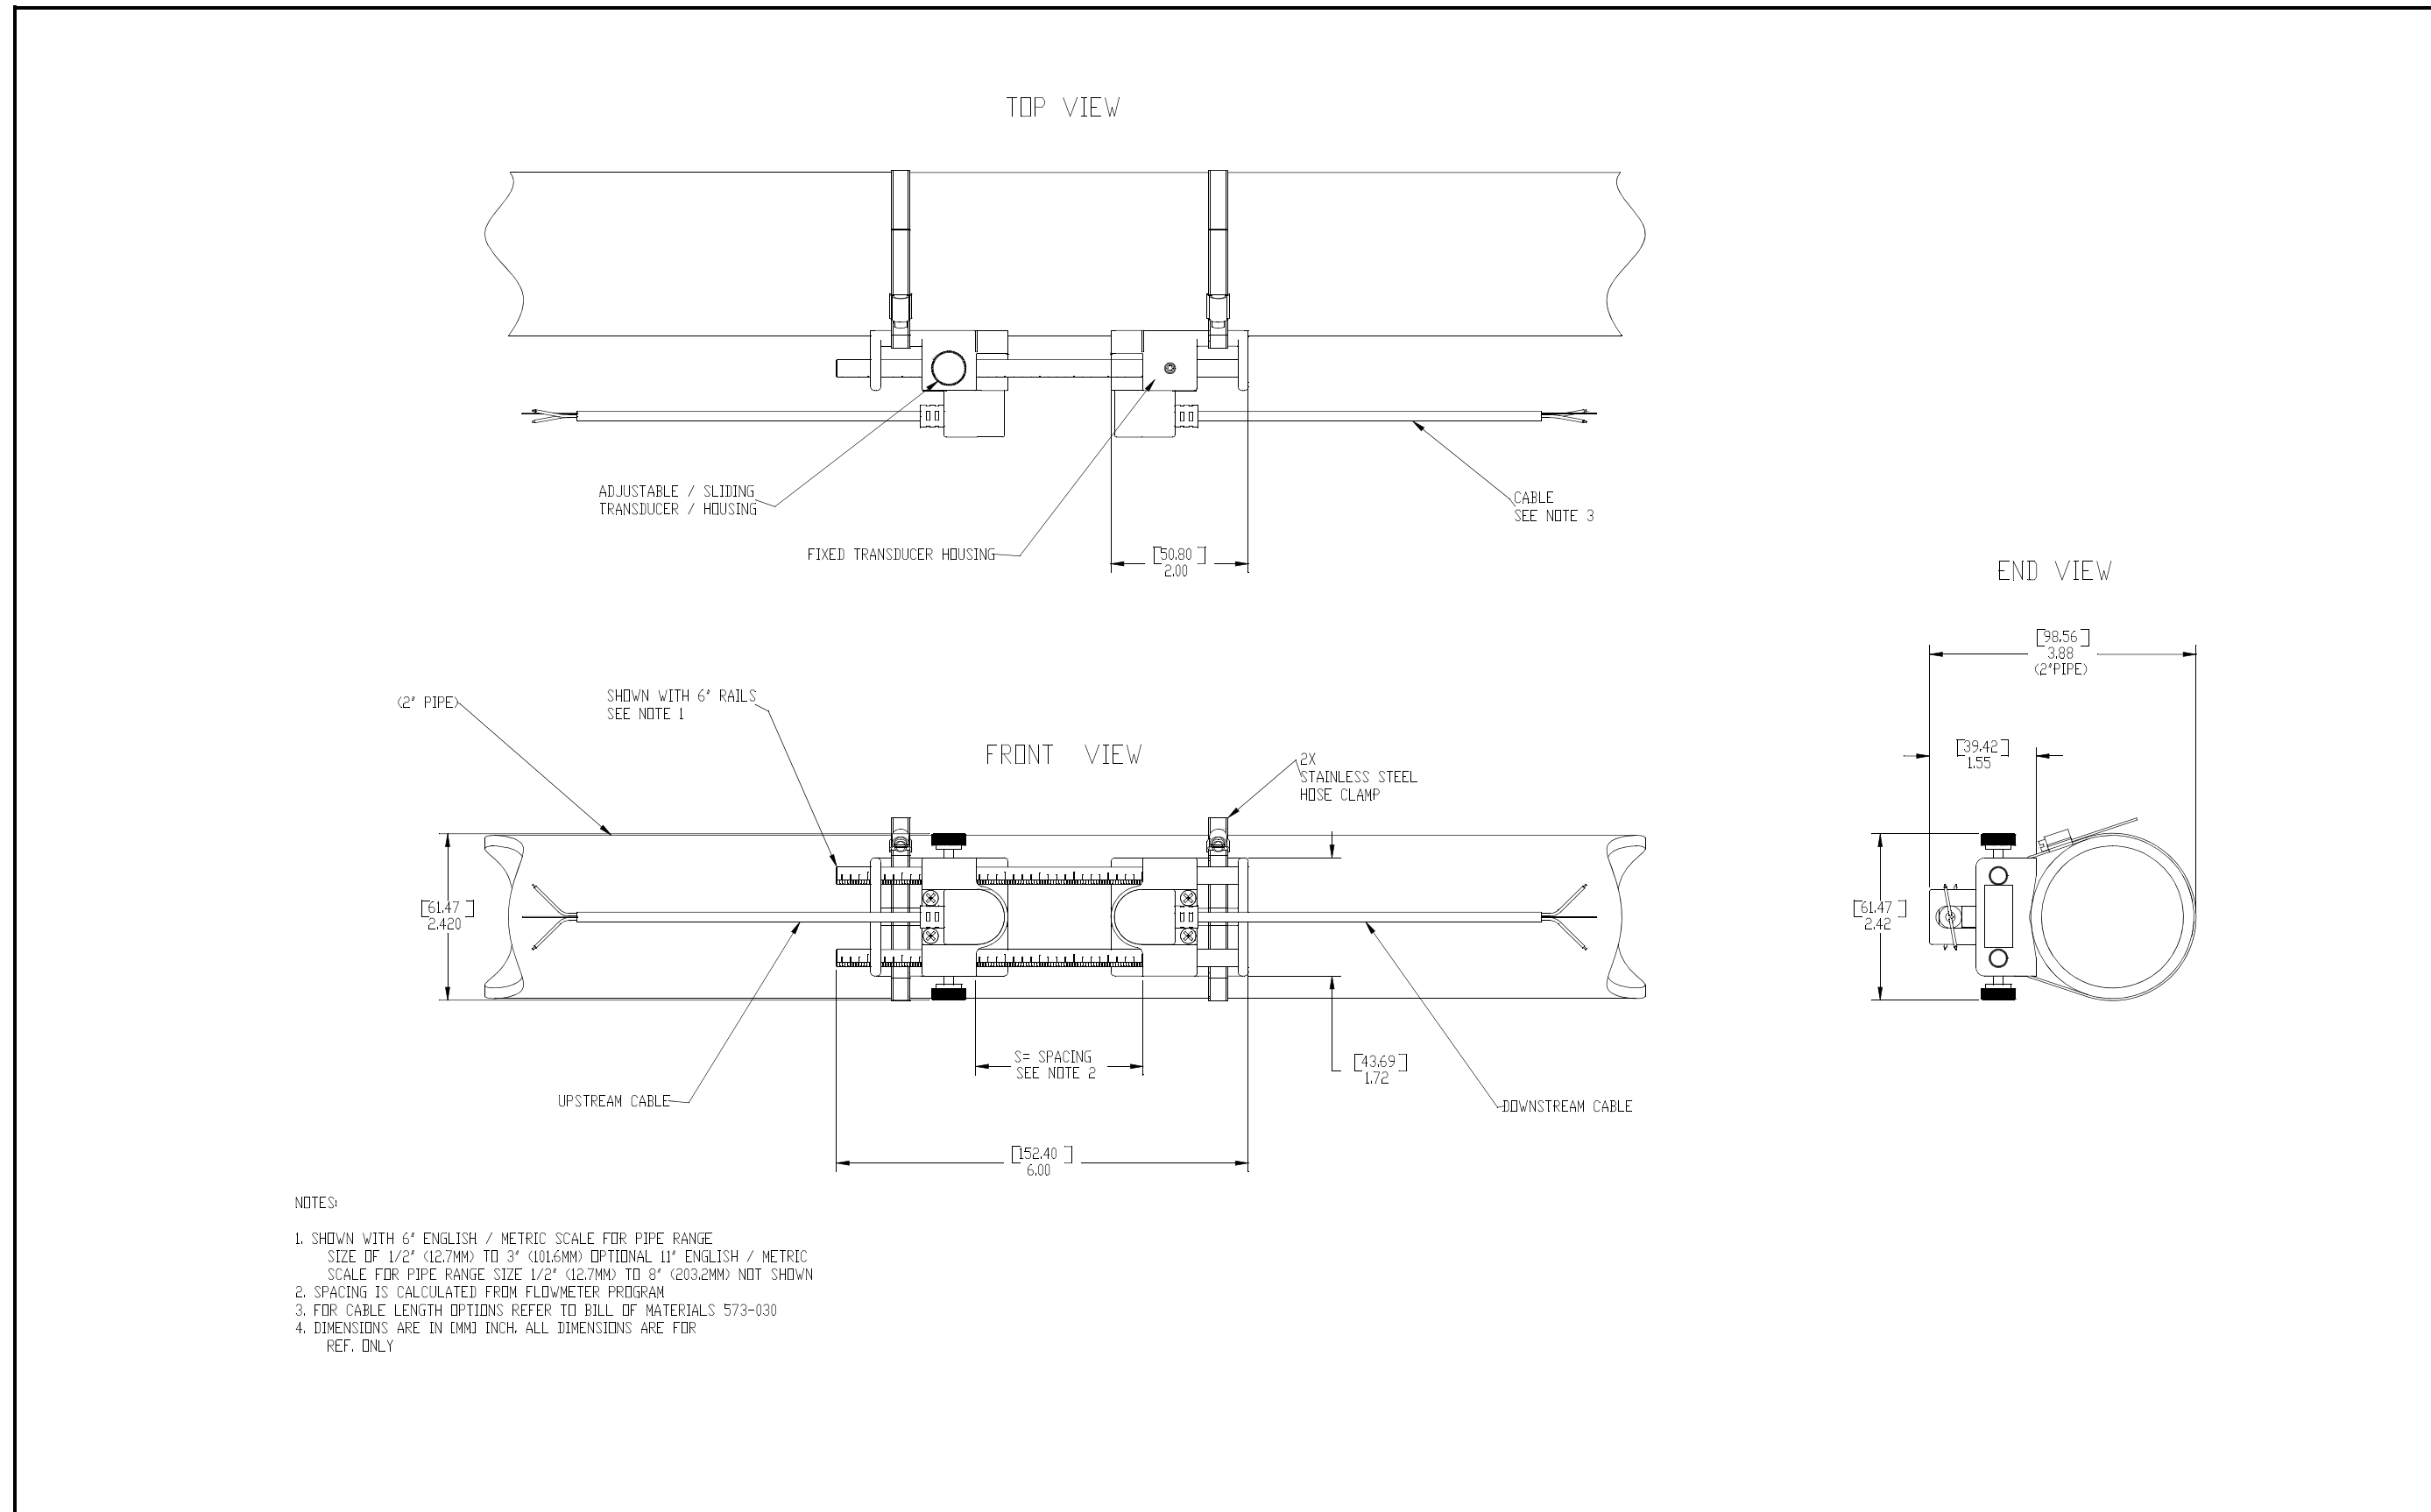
Clamping Fixture Outline and Installation (Dwg. #570-076, rev. 1)
